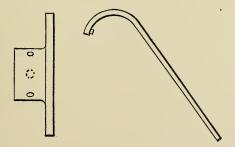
To Unscrew Face Plate of Wood Lathe.
